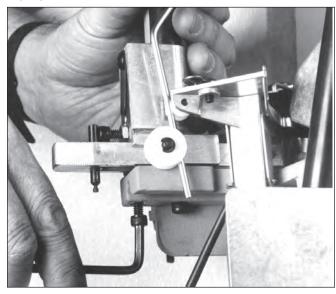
Removing the primer feed body to change primer slides. Caution do not over tighten these bolts (#14014).
